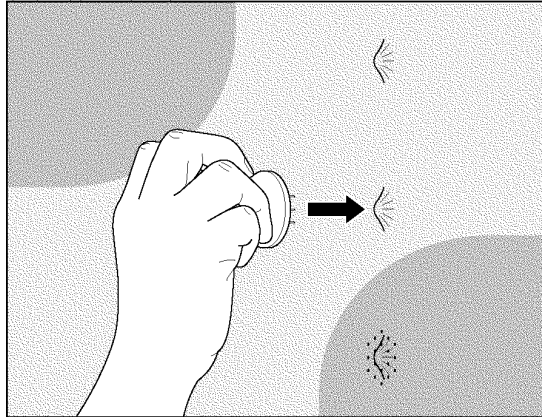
Using a Power Grip Magic Pad Rivet Applicator CMP-1
